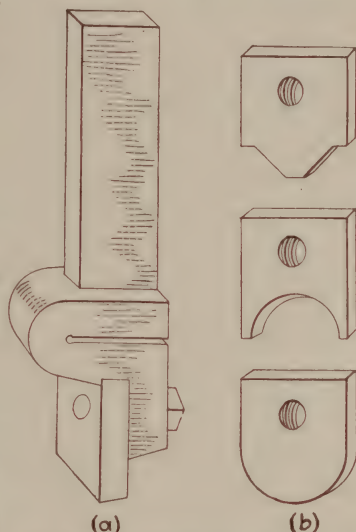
(a) Spring toolholder and square-nose tool. (b) Types of tools.
